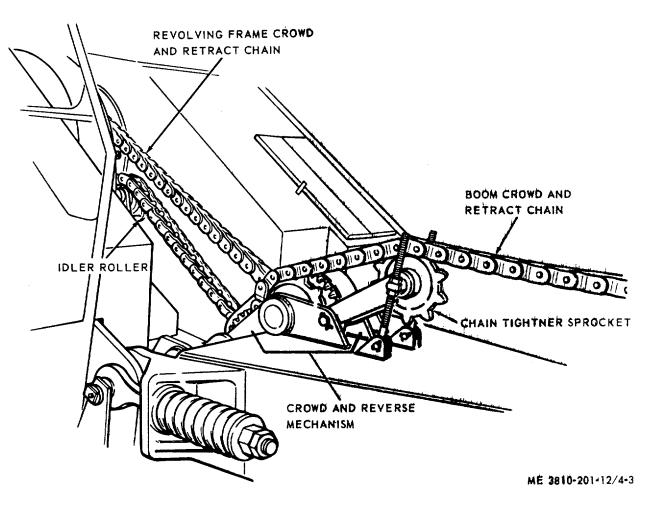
Crowd and retract chain, removal, installation, and adjustment.
